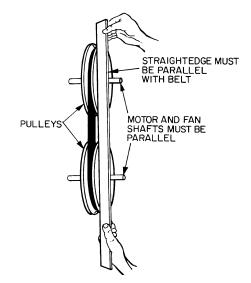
Evaporator-Fan Pulley Alignment and Adjustment
